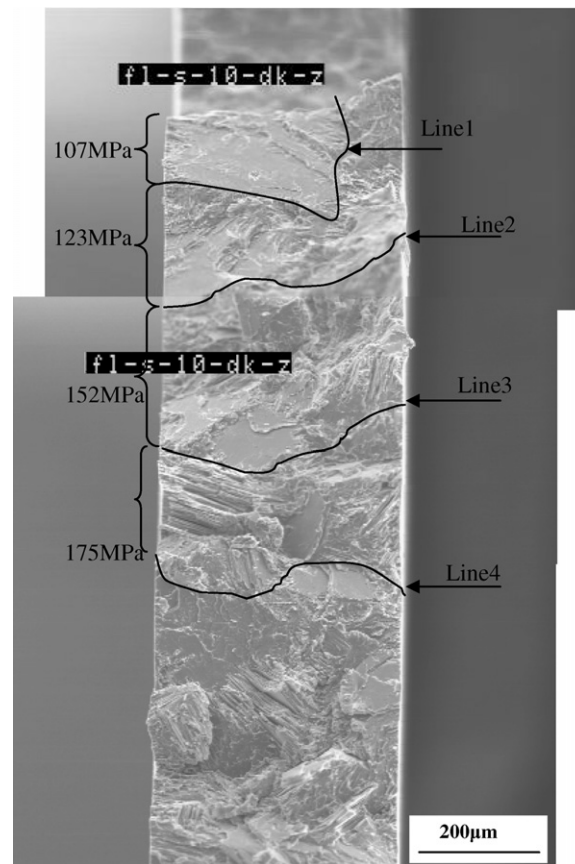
Fracture surface of specimen fl-s-10.
